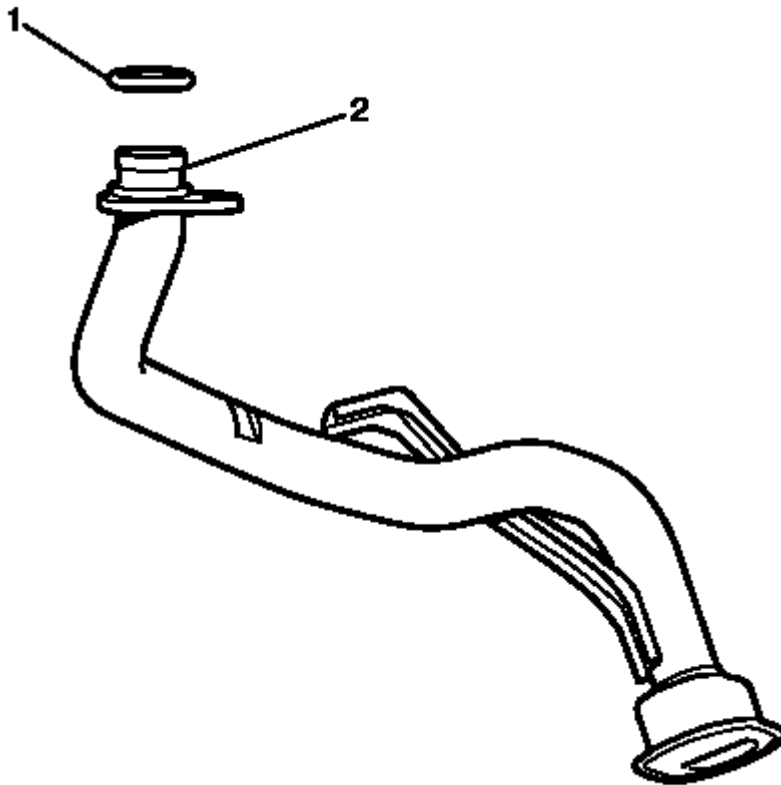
Identifying Oil Pump Screen & Tube Assembly O-Ring Seal
